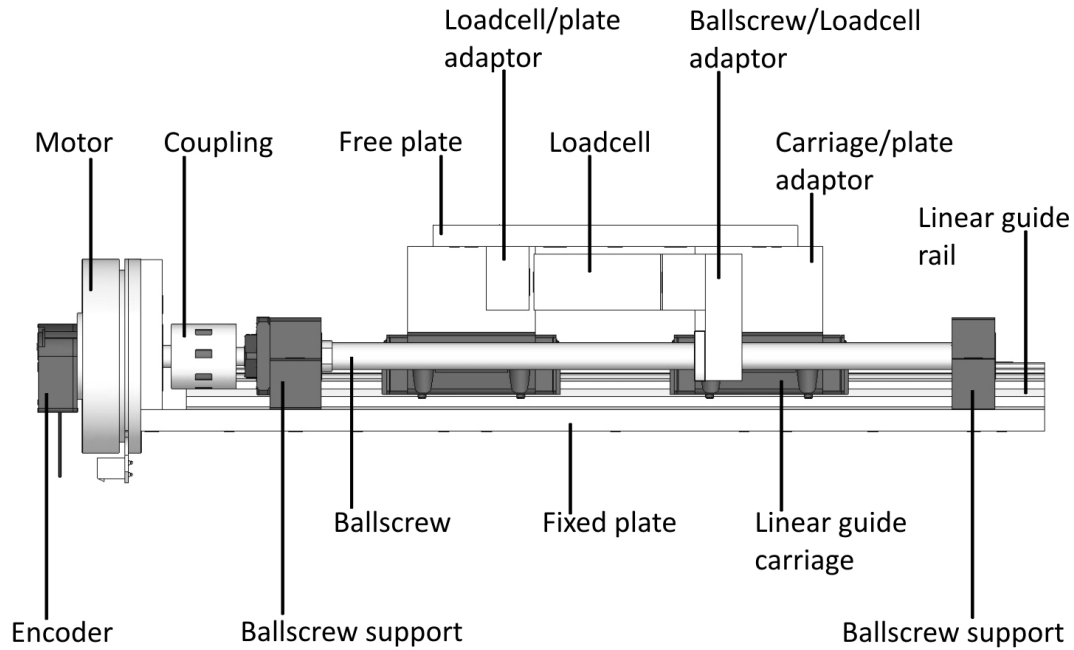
Side view of translation axis, one linear guide assembly is removed for clarity
